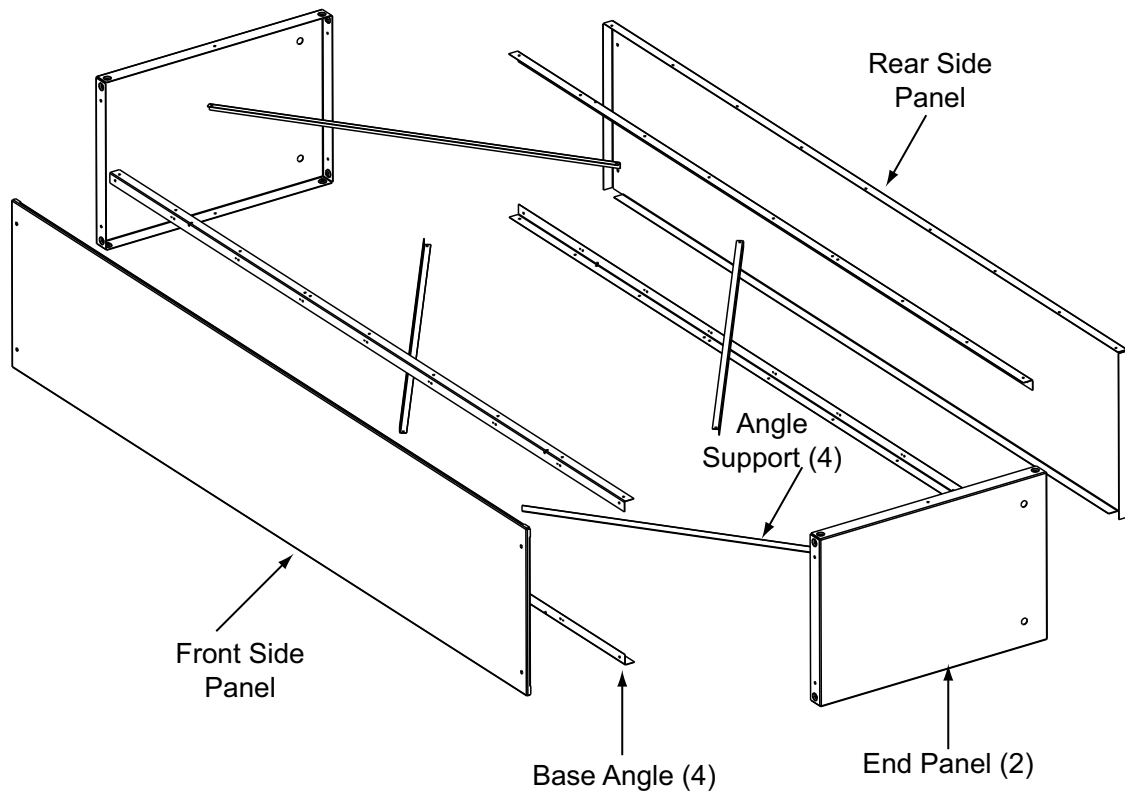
EXPLODED VIEW OF BASE MODEL 1BS0408
